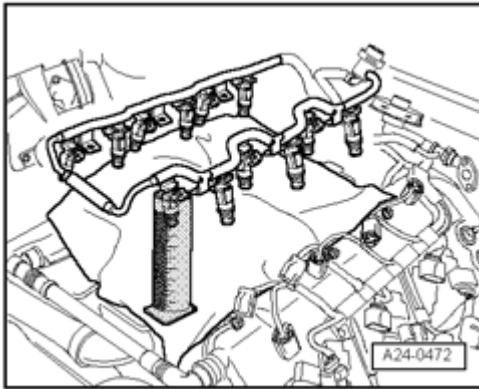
Injector To Be Tested Inserted In A Measuring Glass Of Calibration Tester V.A.G 1602
